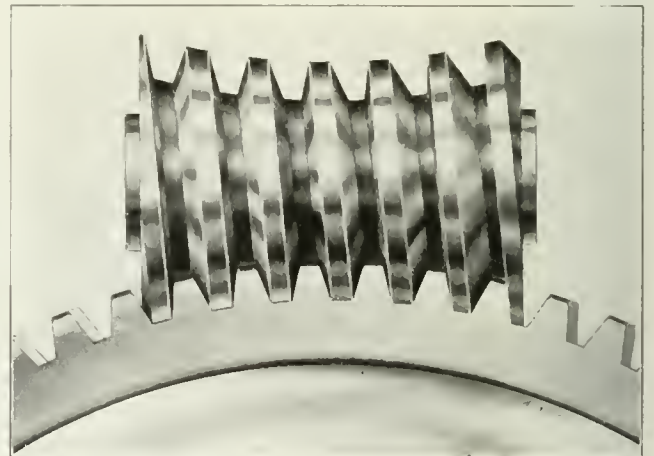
Typical Hindley Worm and Worm-wheel cut on S. & S. Hobbing Machine
